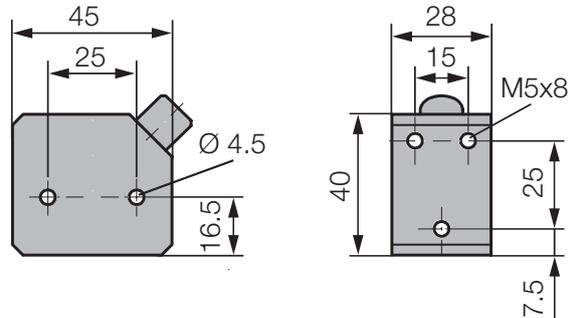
Installation dimensions of BTL5-P-4500-1 magnet
